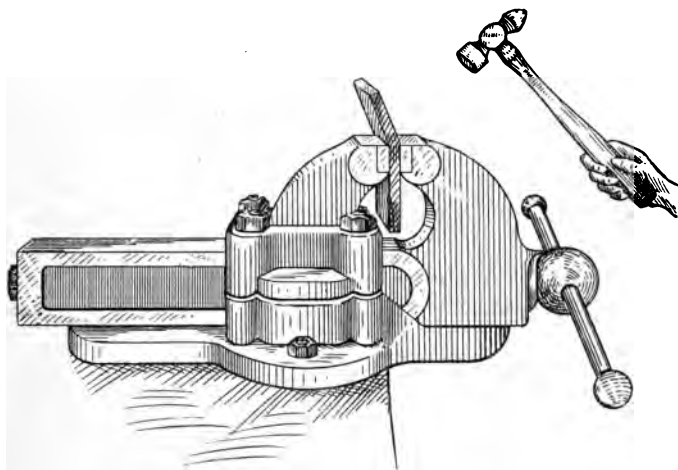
BENDING A TEST-PIECE IN A VICE.
